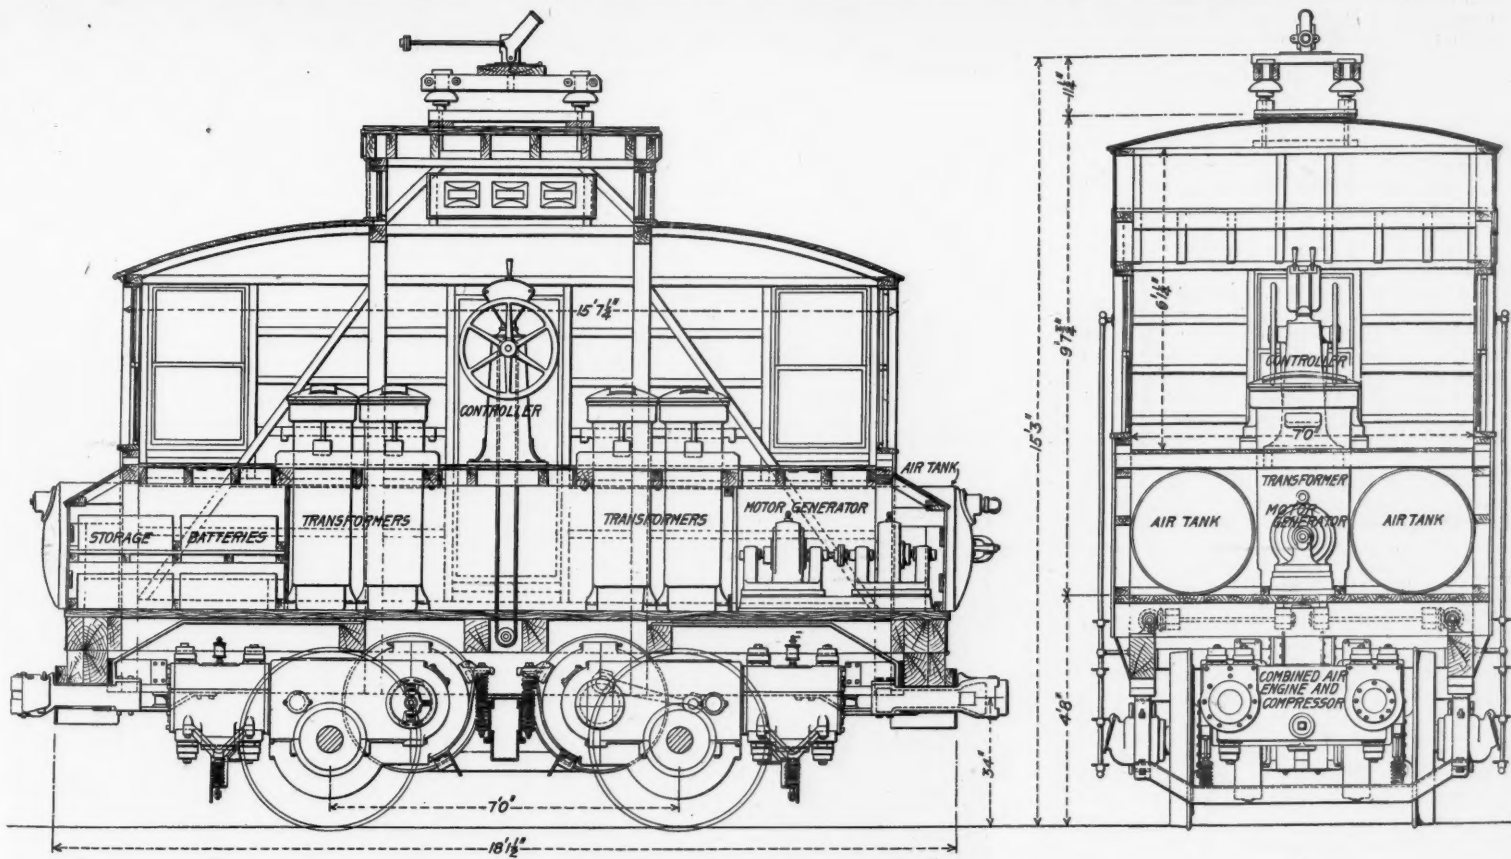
Arnold Electro-Pneumatic, Single-Phase Locomotive.
